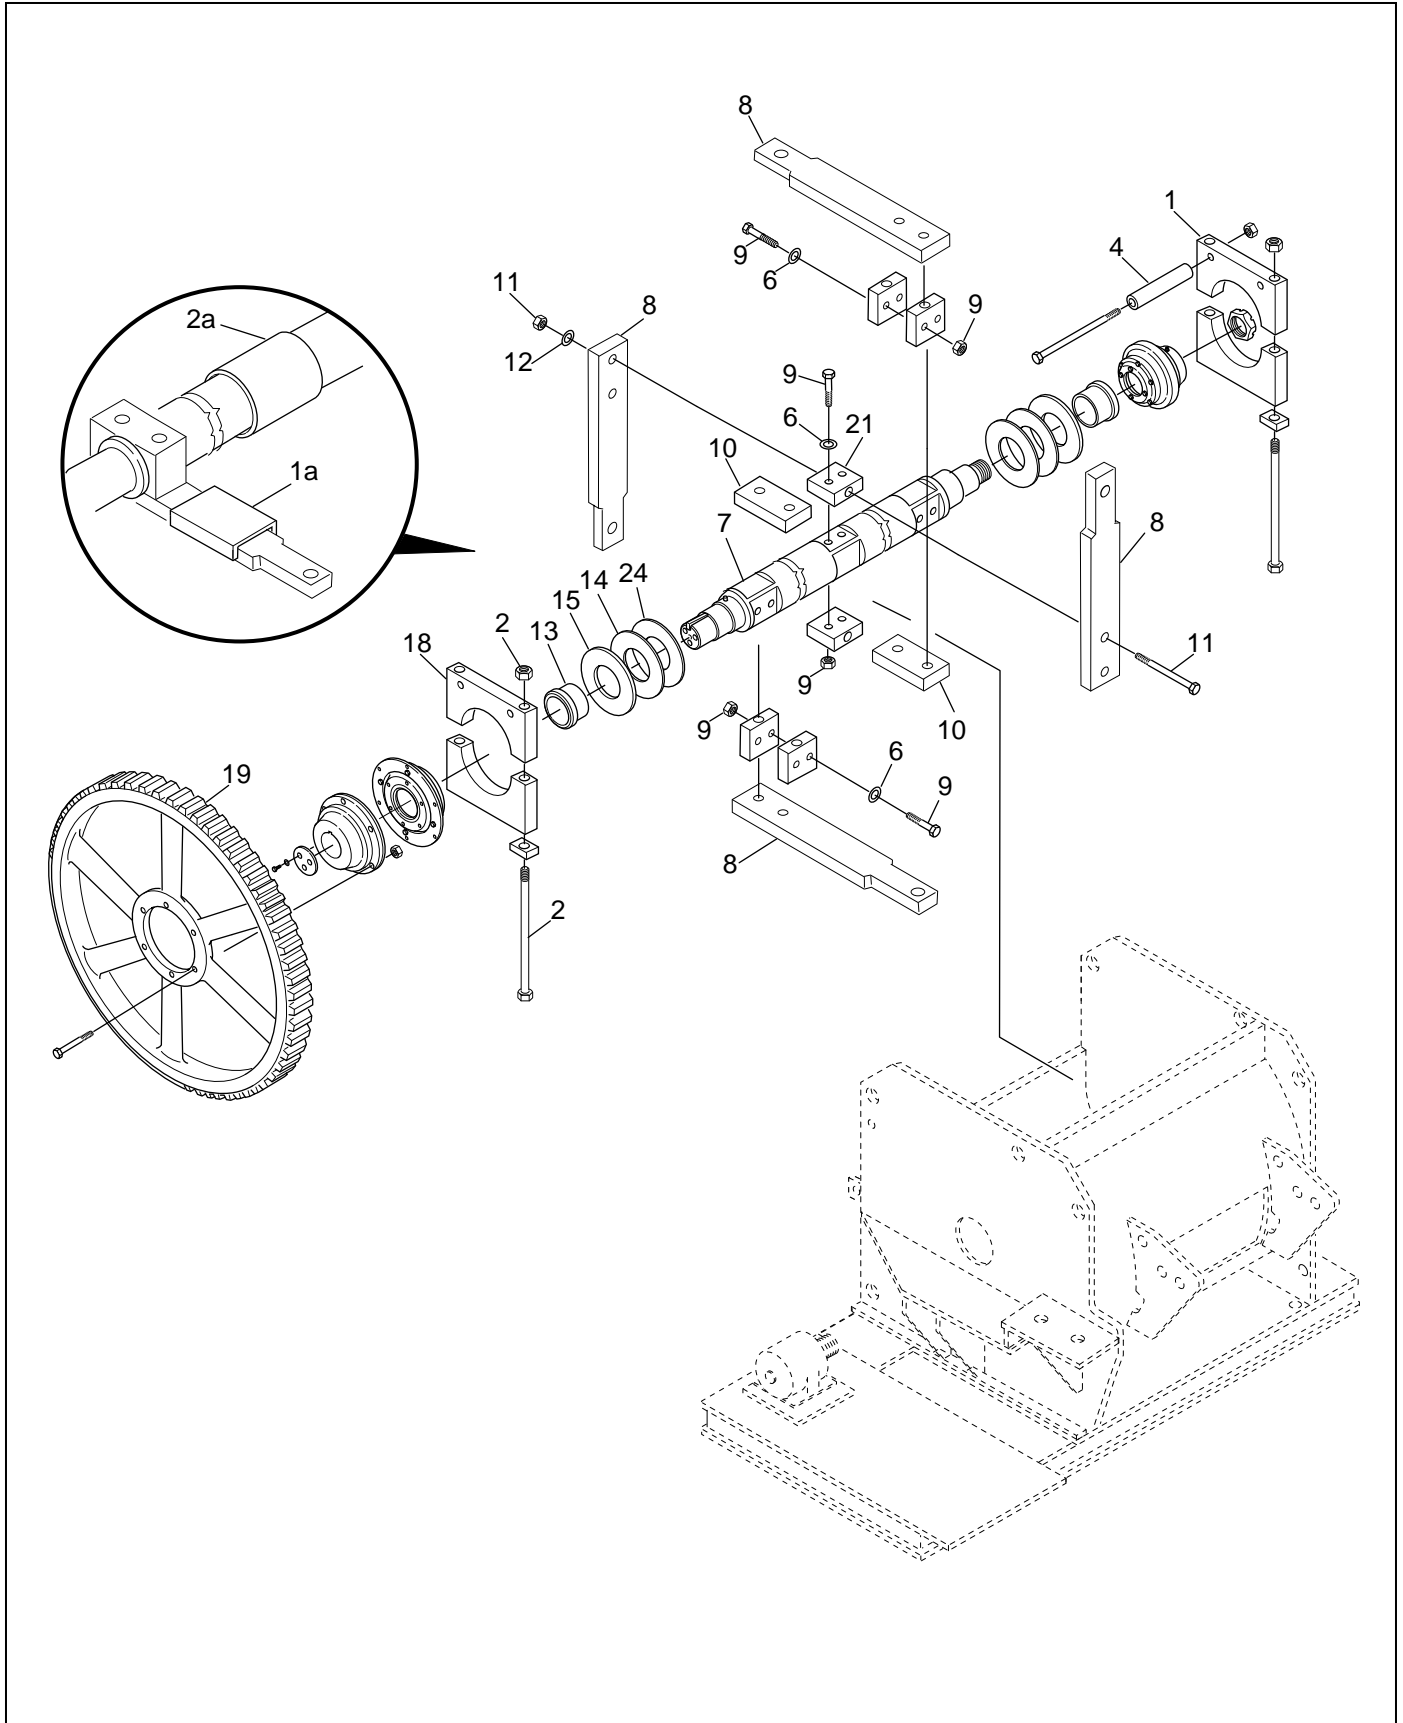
Blade Shaft Subassembly – Less Blades (#312507)
